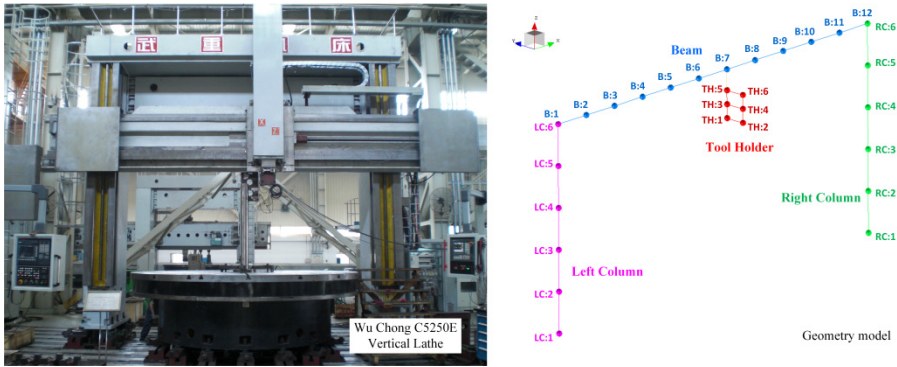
The vertical lathe C5250E and its geometry model used in tests
